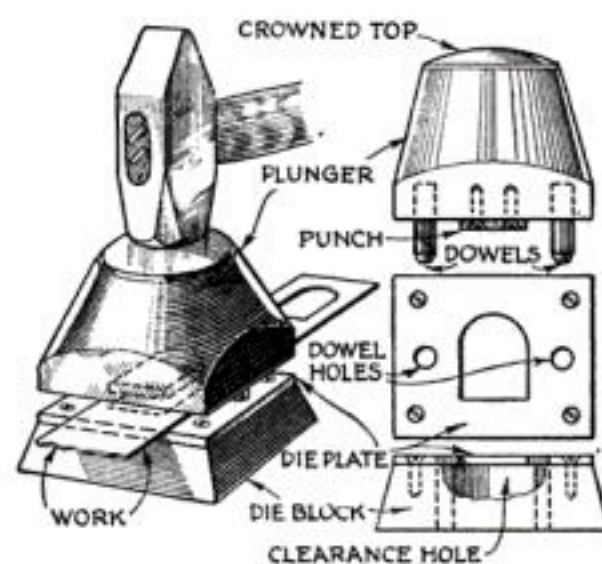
Hand operated punch and die for stamping small parts without a press.
